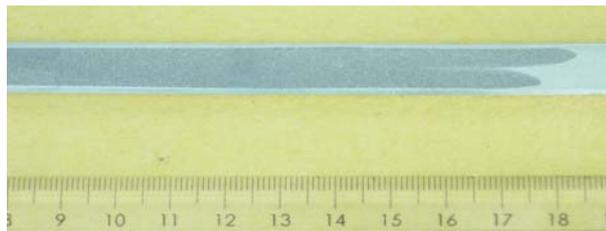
Cross sections of the indirectly co-extruded fuel rod from a cylindrical billet;
